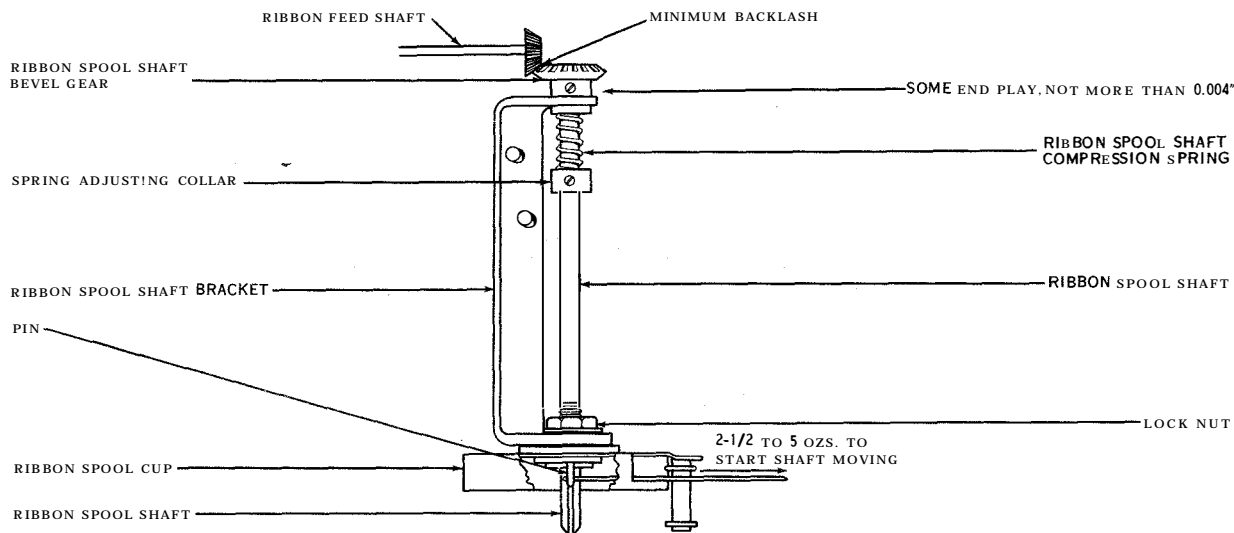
Ribbon Spool Shaft Gears and Bracket
